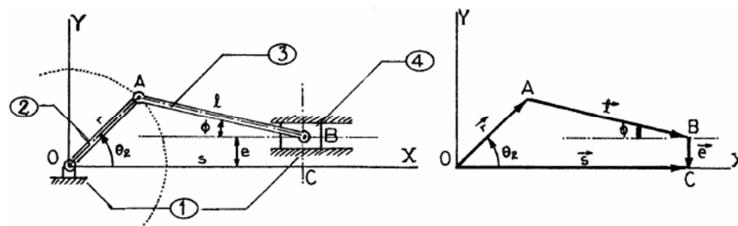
Single blade and double blade cutter bar controlled by mechanisms rod-crank type plans (1: Fixed link, 2: Crank 3: Connecting rod, 4: Slider or Piston).
